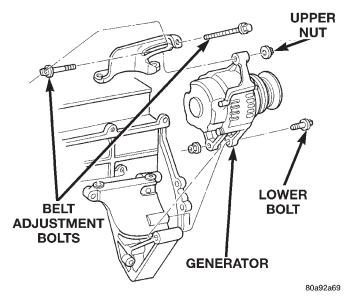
Remove/Install Generator—4.0L Engine—RHD
